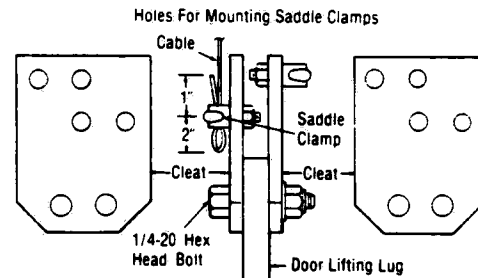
ATTACHING DOOR CABLE TO CLEATS.
